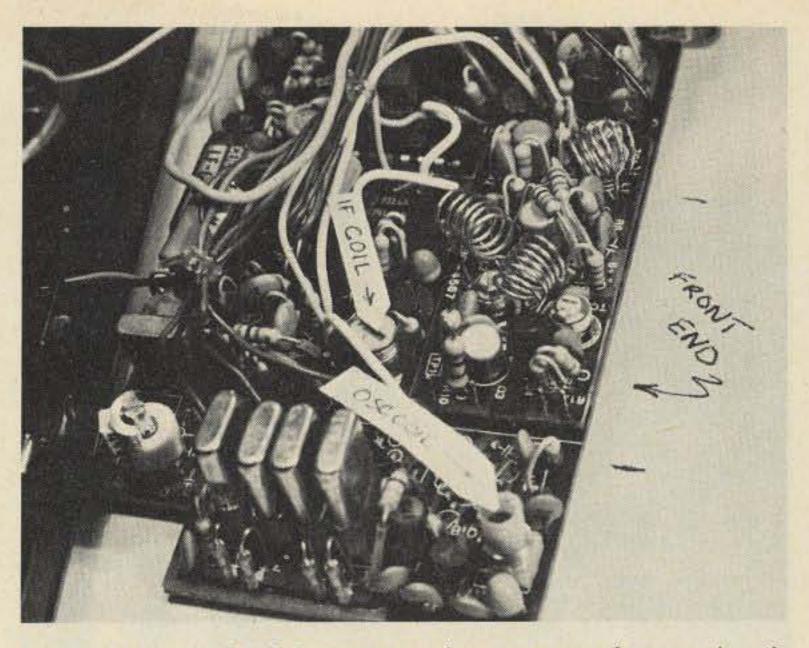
Inside PRO-5 receiver, showing new front-end coils and main PC board alignment points.
